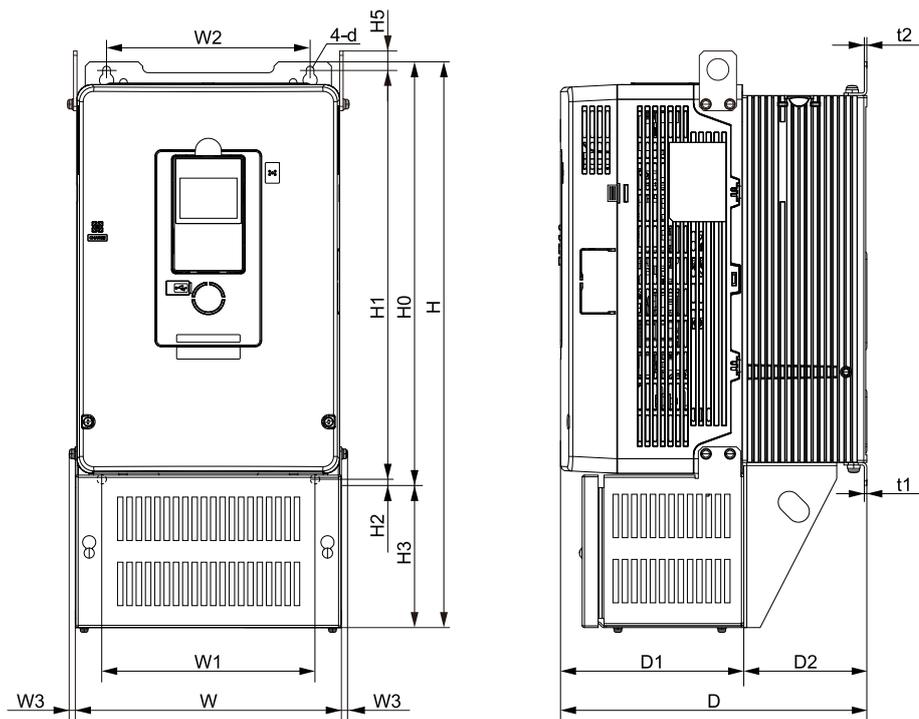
Exterior and Mounting Dimensions Diagram 4
